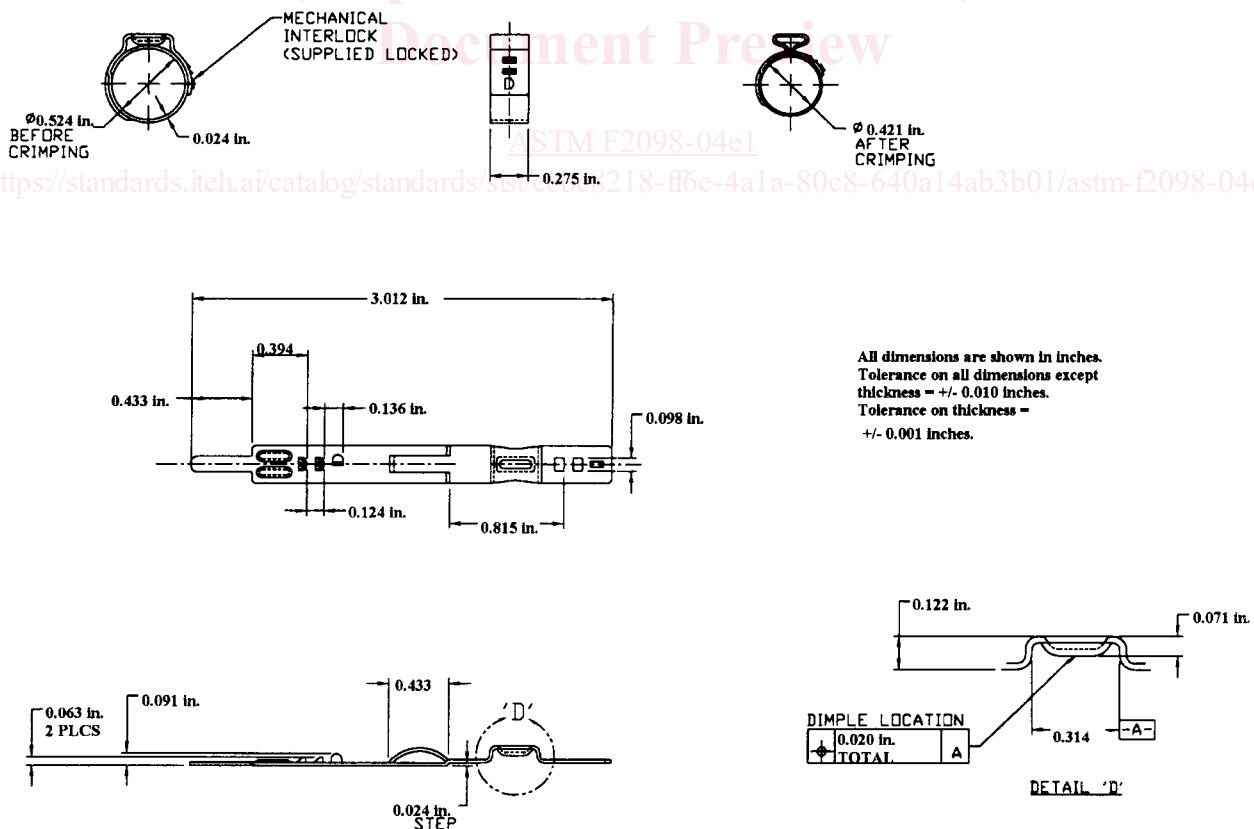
Stainless Steel Clamp Dimensions, 3/8-in. nominal
